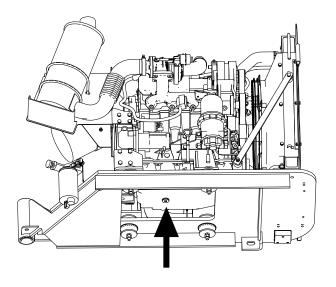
Cummins QSF2.8t3TC72 engine oil drain valve
